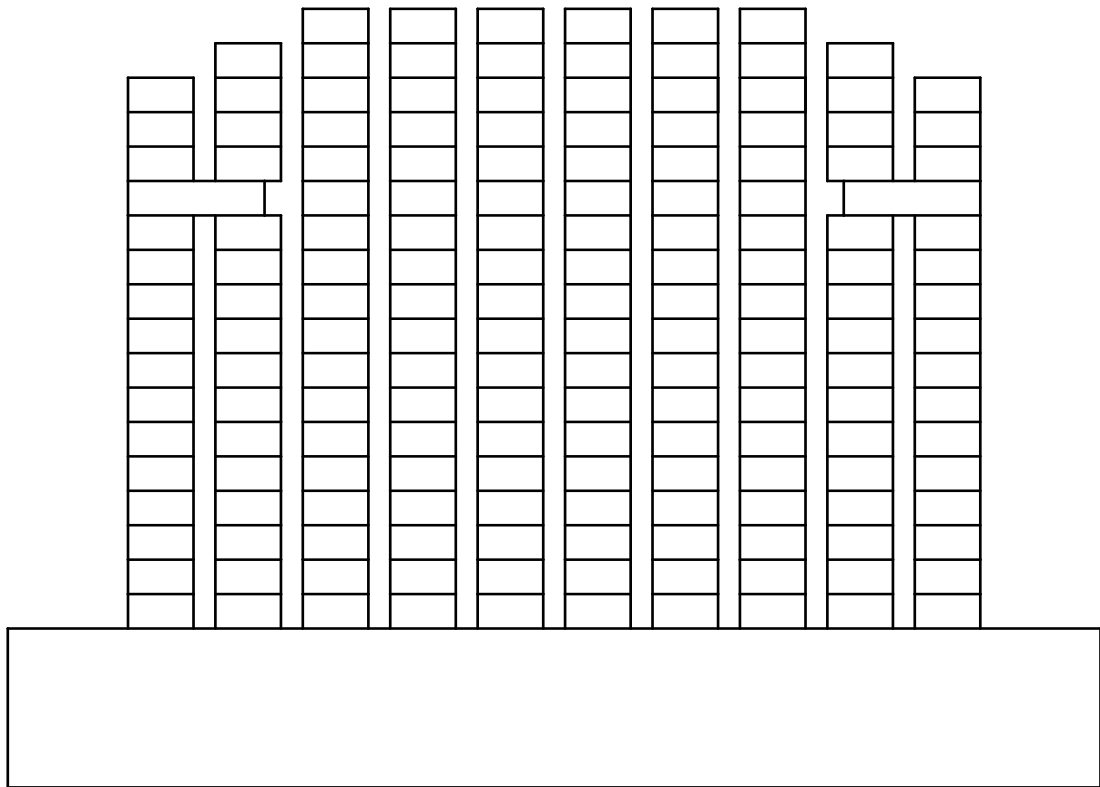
Laying bricks on the furnace trolley (front view)
